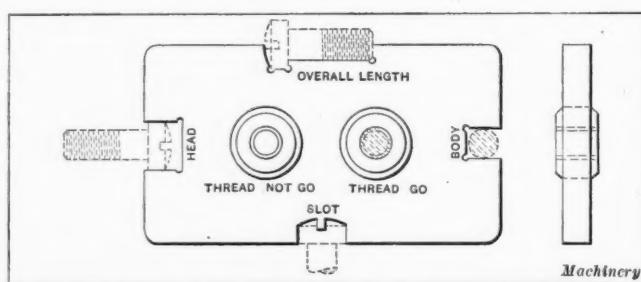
Progressive Type of Templet Gage for inspecting Fillister-head Screws
